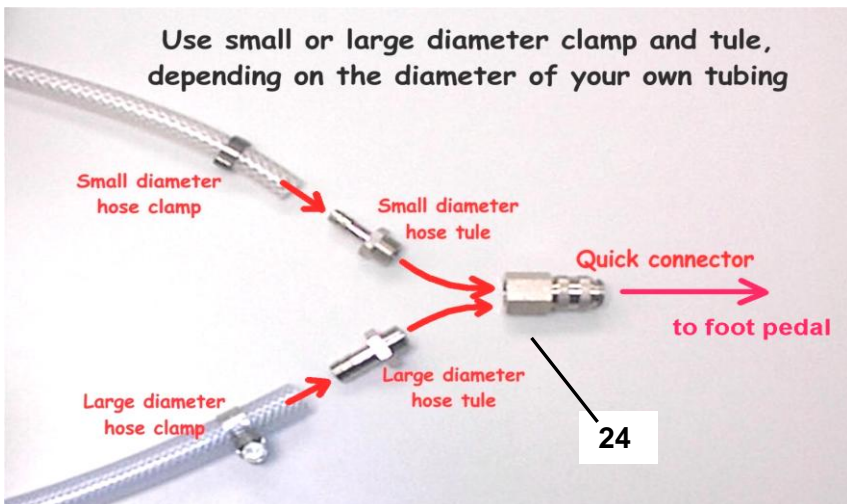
Instruction for fixing the quick connector to the air supply hose
